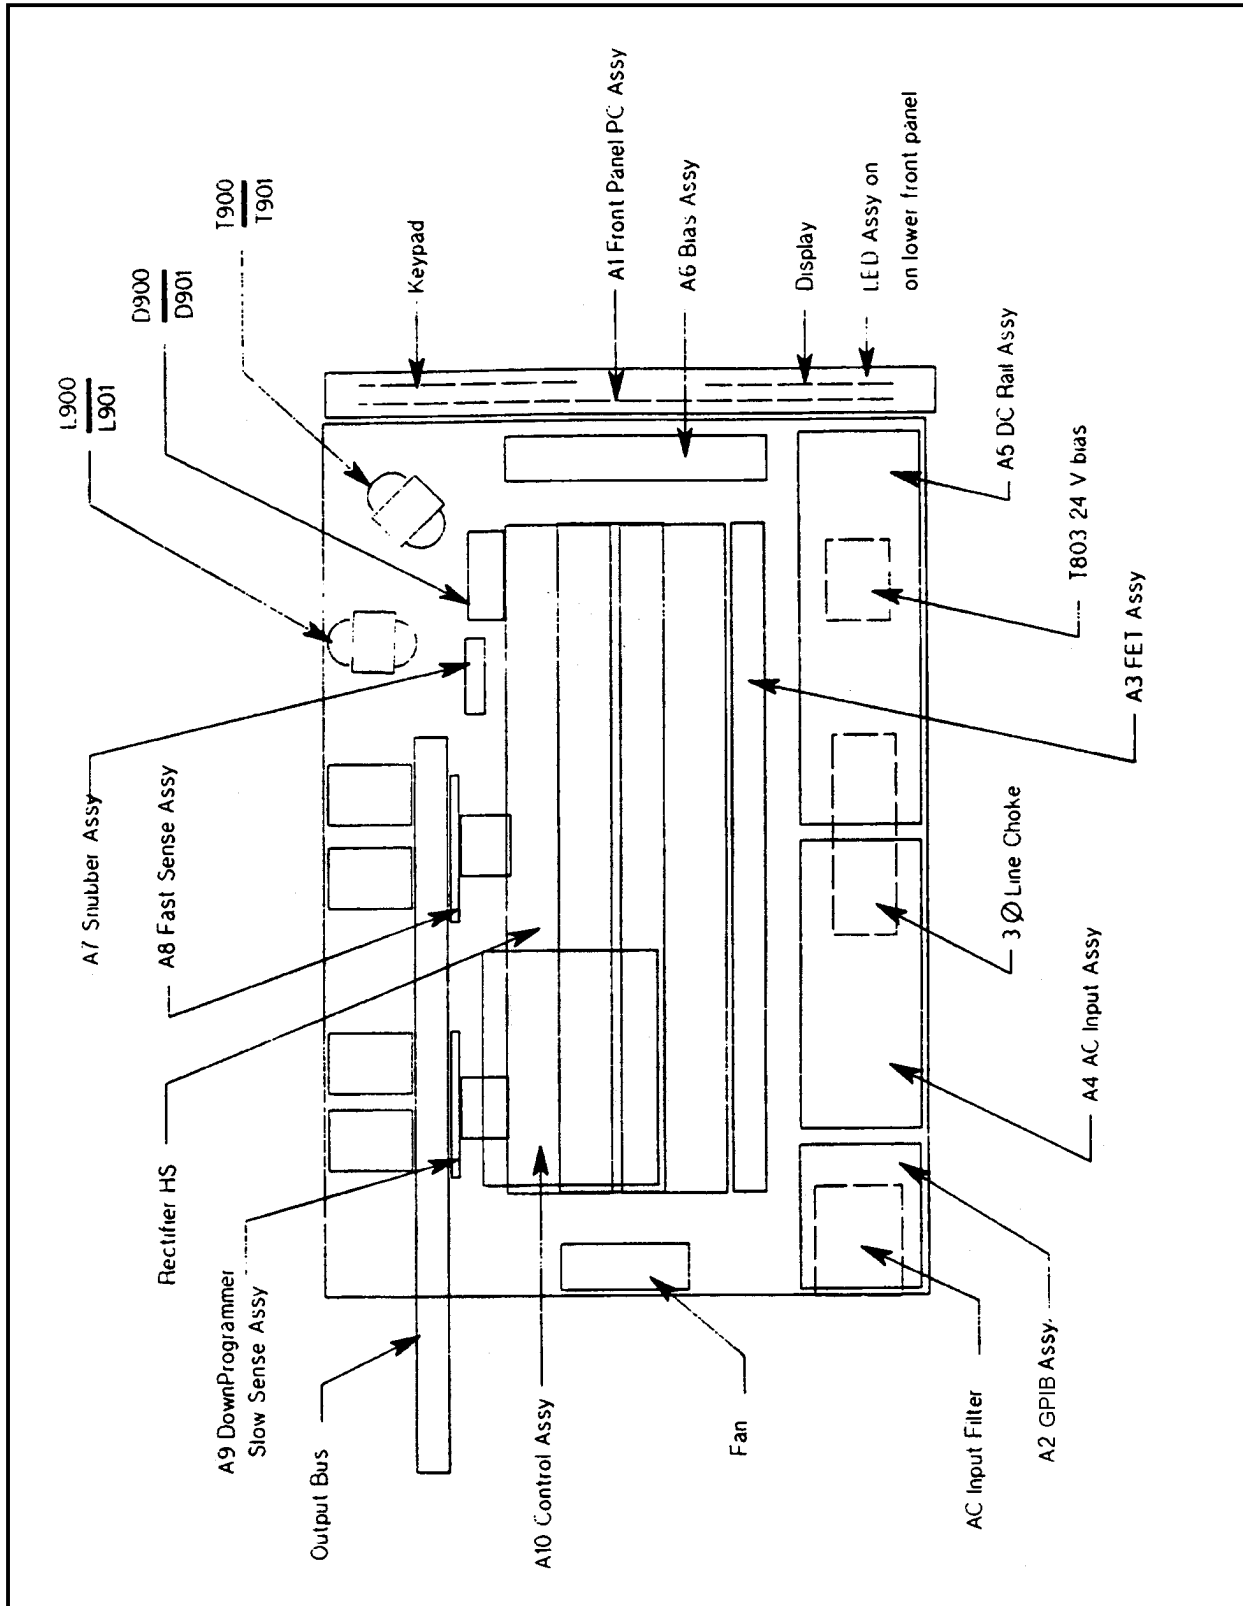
Component Locations (Top Cover and RFI Shield Removed)
